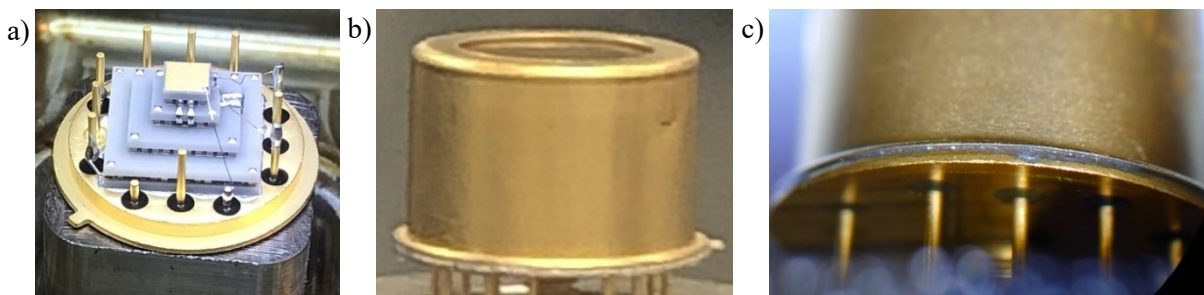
Semiconductor nanowire single-photon avalanche diode header, can, and thermoelectric cooler (TEC) packaging. a) Thermoelectric cooler and transistor outline package (TO-8) header assembly including the wire-bonded top metallized plate, TEC supply, and thermistor wire connections to header output pins. b) Advance ADY/Santek Sapphire windowed can on the TO-8 header. c) Cap-header interface hermetically sealed in a nitrogen glovebox enclosure by reflow soldering.
